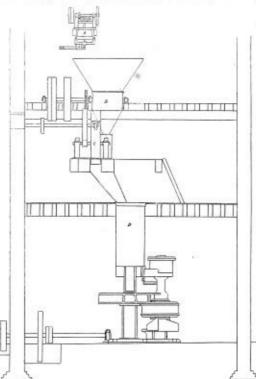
THE MANUFACTURE OF PATENT FUEL
